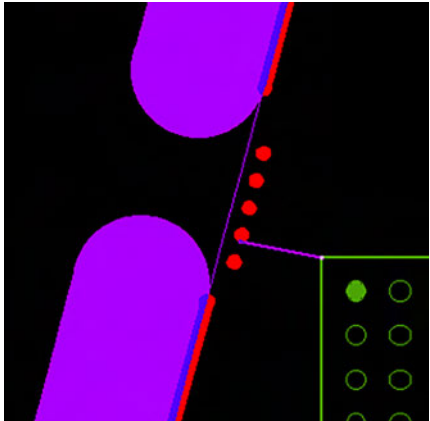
Placing breakaway tabs too close to SMD pads can result in damage to the solder joint when you separate the PCB from the panel.
